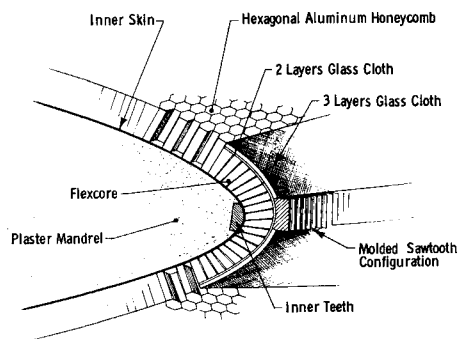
Typical cross-sectional view of leading edge of wing prior to final skin wrapping.
